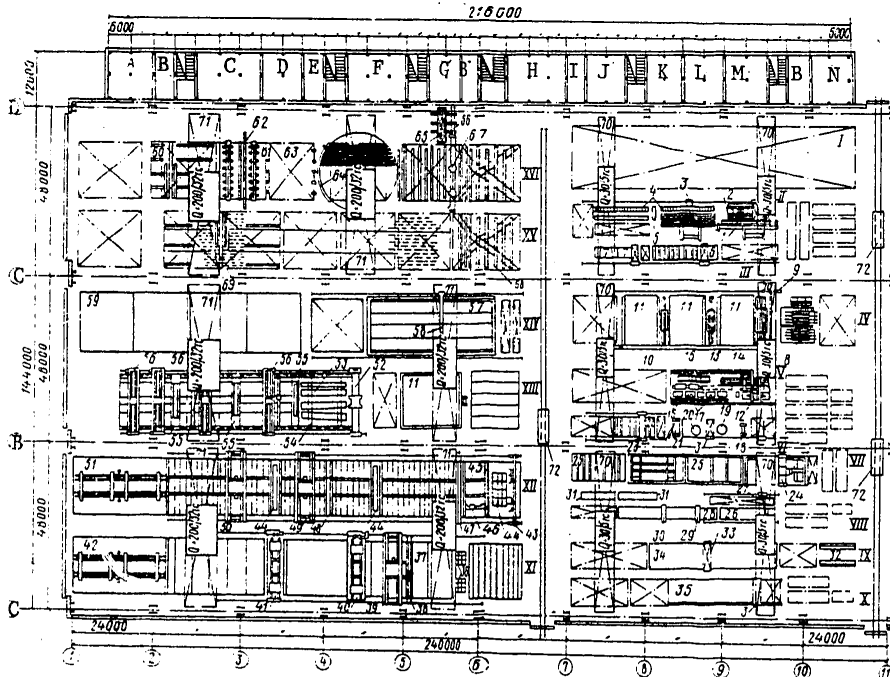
Layout of the assembly-welding shop at a class I shipyard [Legend on following page]
